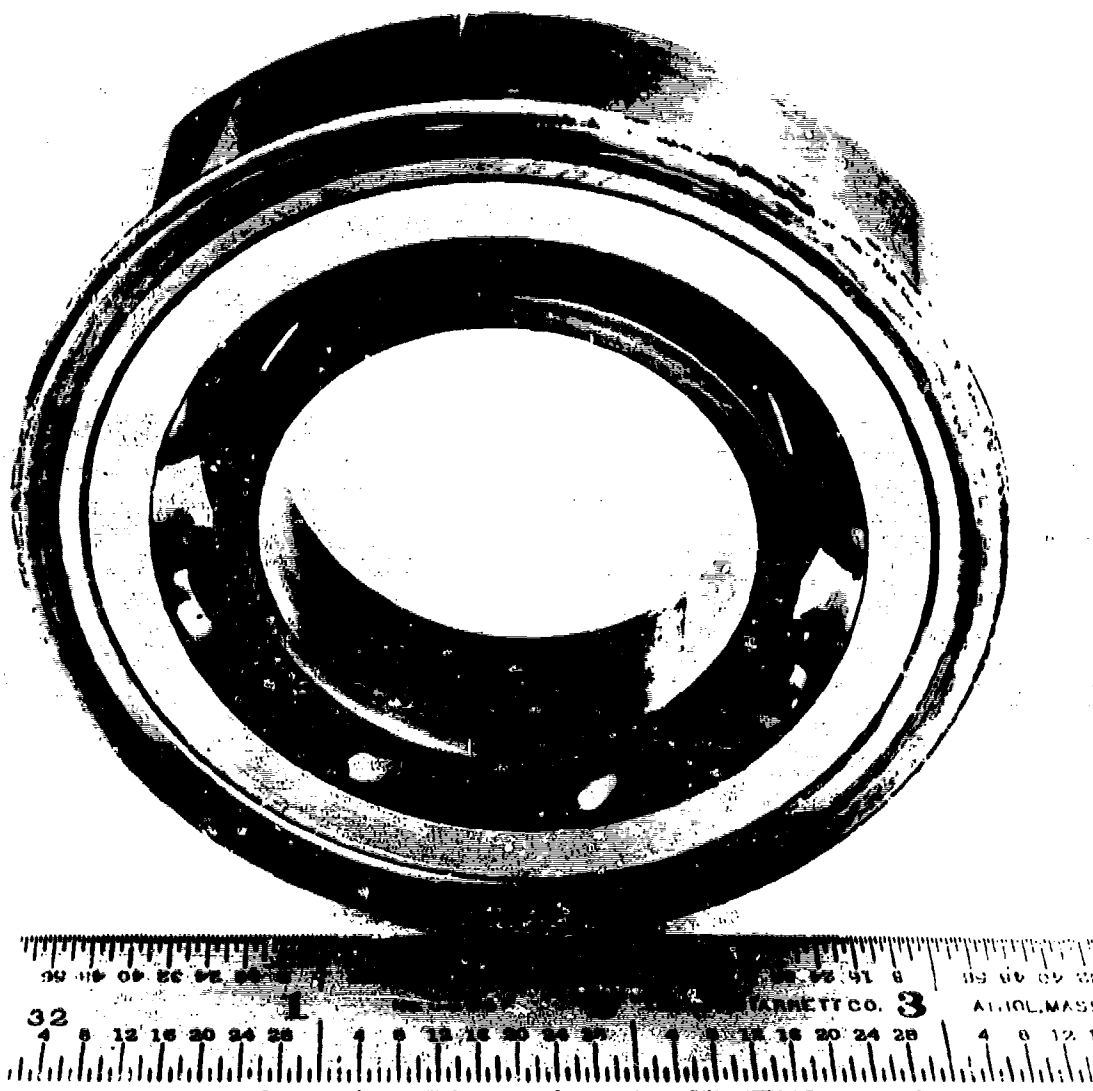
Assembled View of 40-mm Bore Ball Bearing.
